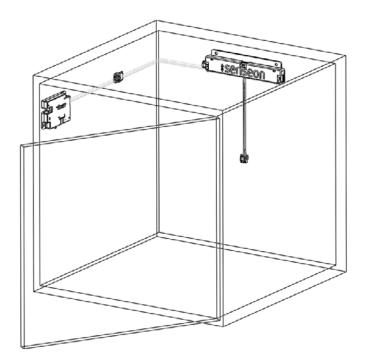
One lock cable routing from a hub to a side mounted stand alone lock
